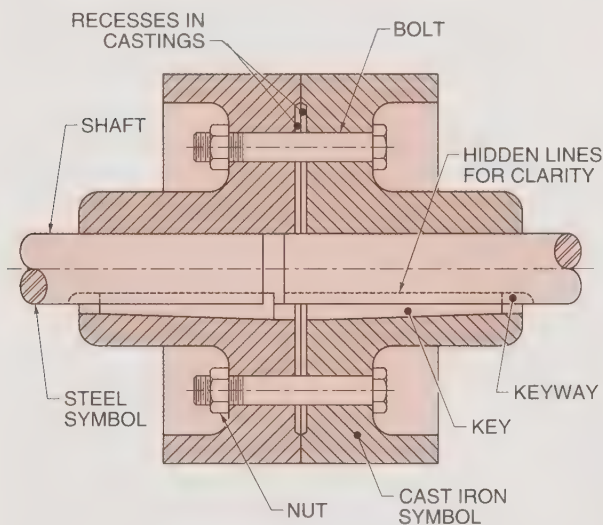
Elements such as bolts, screws, and pins should not be sectioned.
